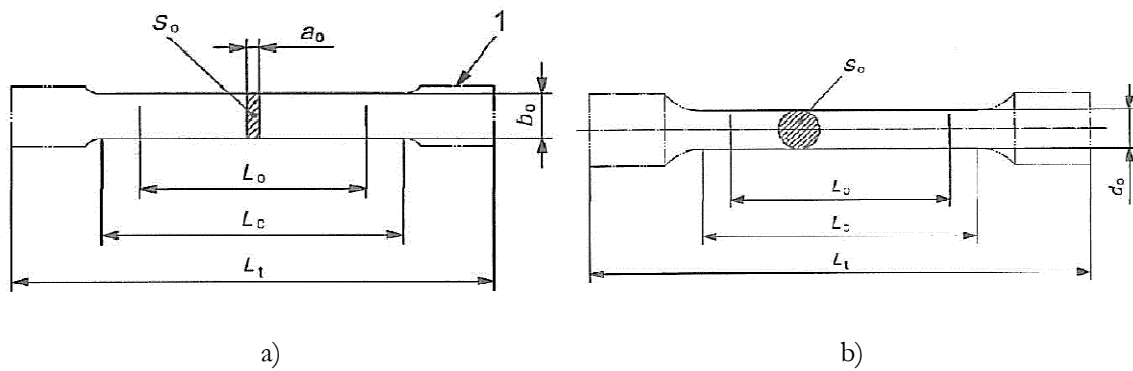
a) Rectangular and b) cylindrical cross-section steel coupons
